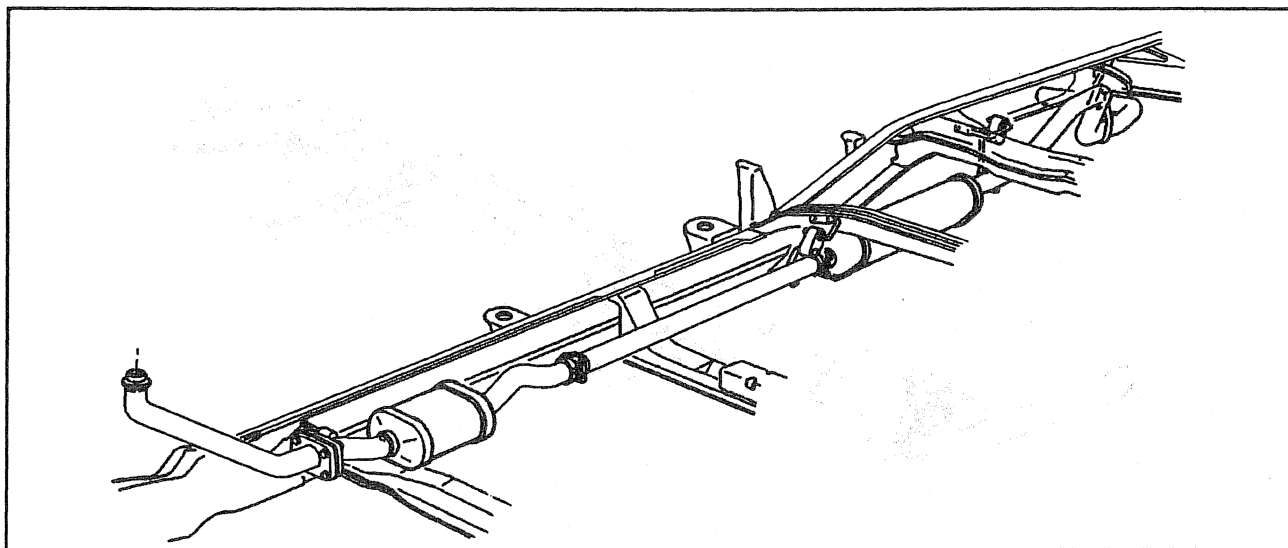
Exhaust System - C/K 3 - Crew Cab w/L65
